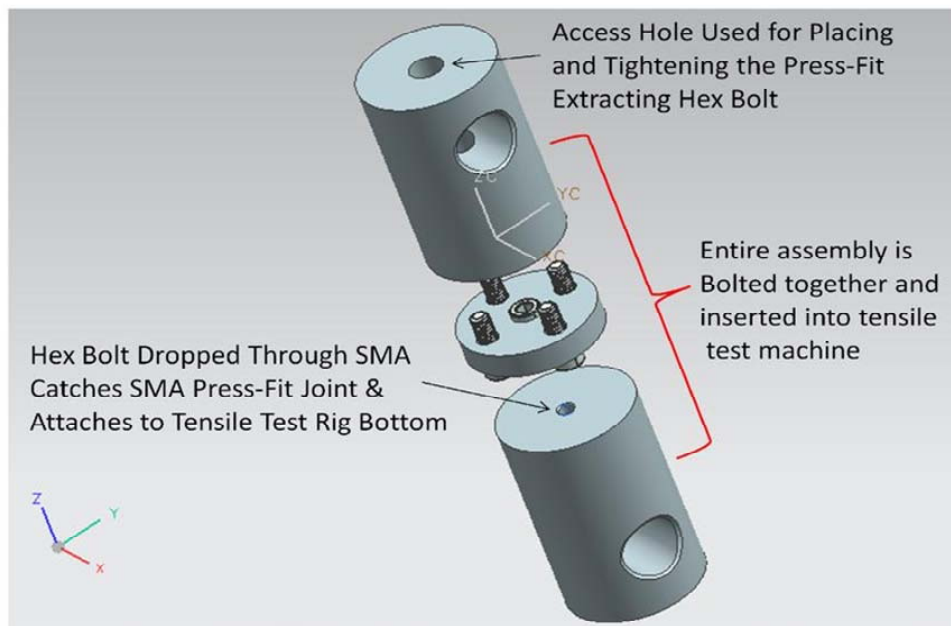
View of SMA²C Tensile Test Rig and Extracting Hex Bolt Threaded Hole
